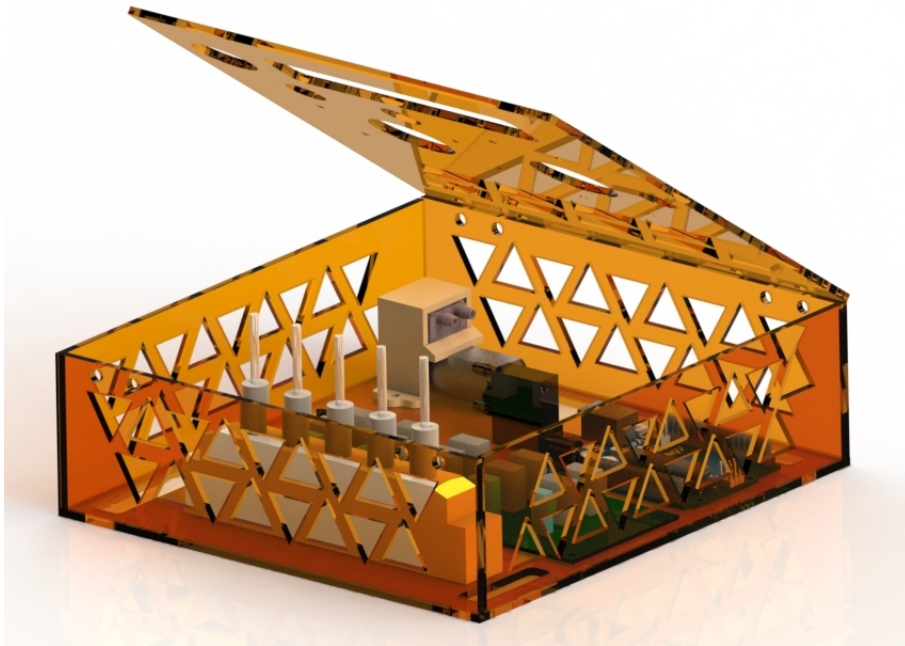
Rendering of instrument enclosure with valve manifold, pump, flow sensor, and driver board.
